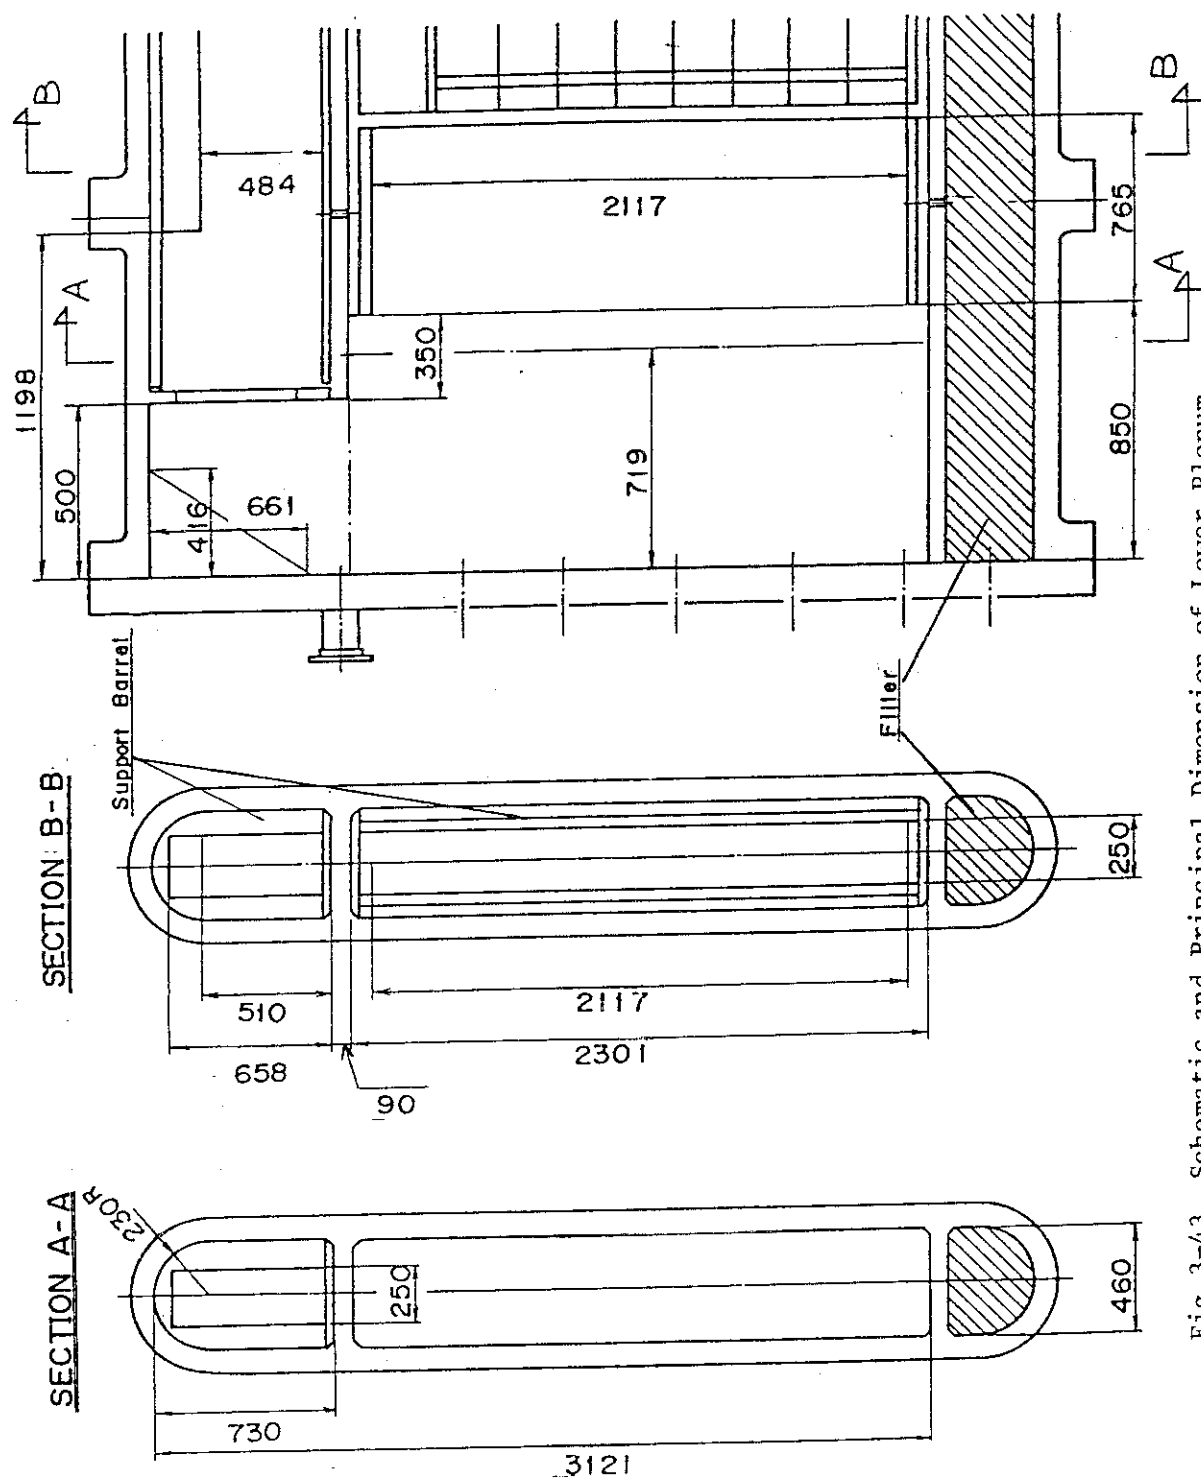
Schematic and Principal Dimension of Lower Plenum
